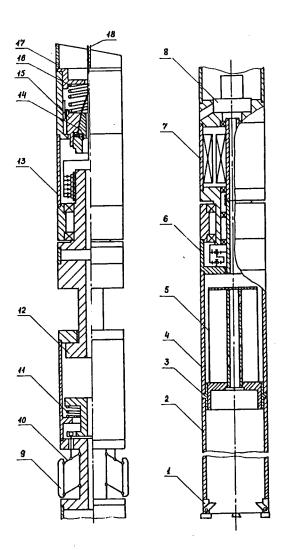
Scheme of the KEMS-112 electromechanical ice core drill: 1-drill head, 2-core barrel, 3-nipple, 4-barrel, 5-chips filter, 6-gear reducer, 7-driving electric motor, 8-pump, 9-skates, 10-levers system, 11-spring, 12-hammer block, 13-electric chamber, 14-copper cone, 15-plug, 16-spring, 17-chips collector, 18-cable.
